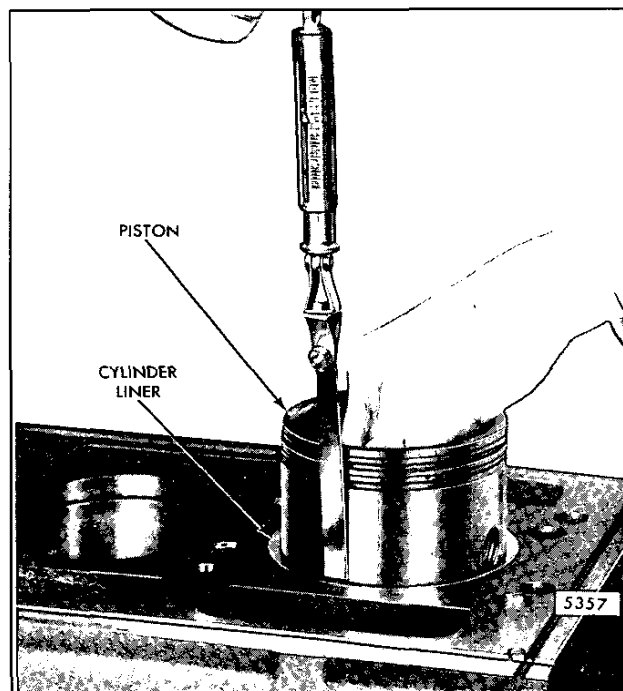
Measuring Piston-to-Liner Clearance with Tool J 5438-01
